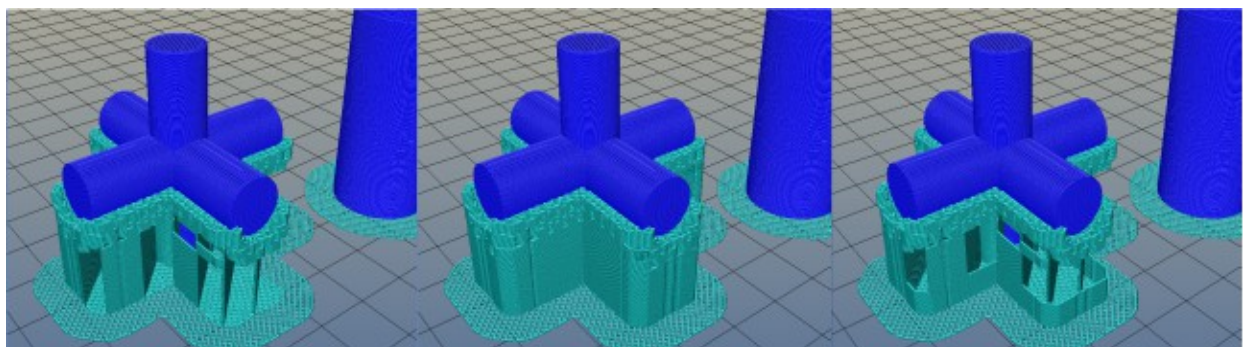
Left to right: support, sheath, 5mm sheath z-roof (all with prime pillar)
